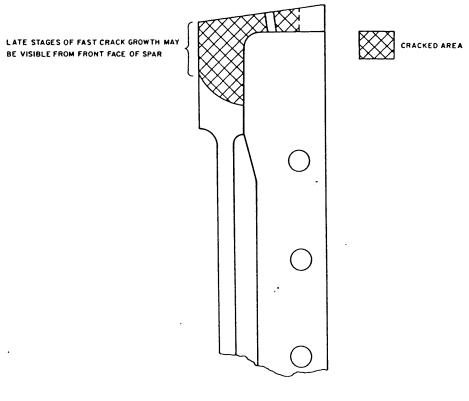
EDDY CURRENT INSPECTION OF SPAR CAP FLANGE
